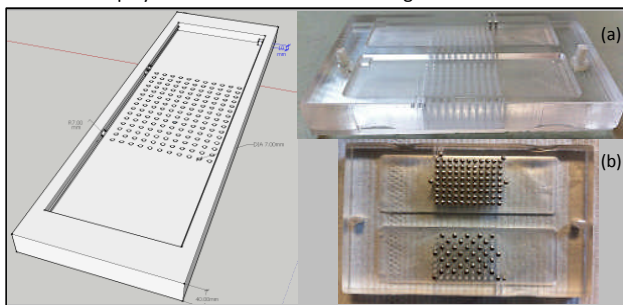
Mechanical drawing of mould and CNC manufactured acrylic mould top view (a) and bottom view with pins (b)
